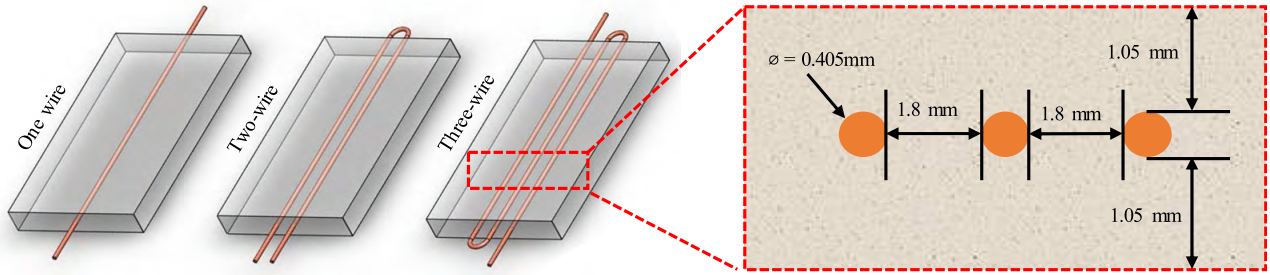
CAD for fabricated coupon with expected cross-sectional dimensions.
